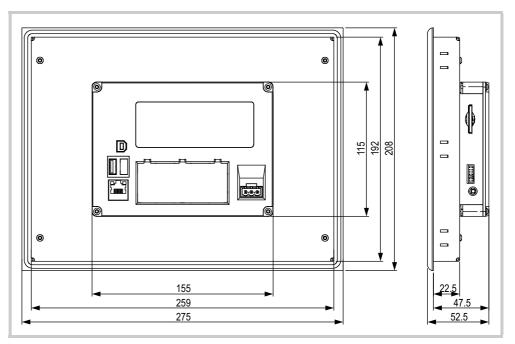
Mechanical dimensions of the 8.4" devices in mm $\,$
